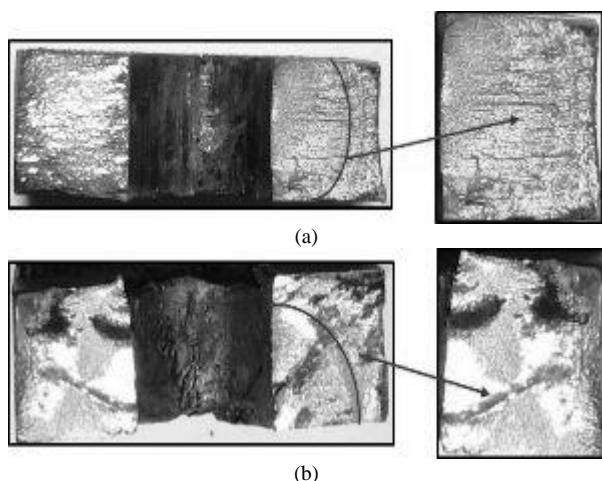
Fracture surface of specimen with interference of (a) 0 and (b) 1.5%
